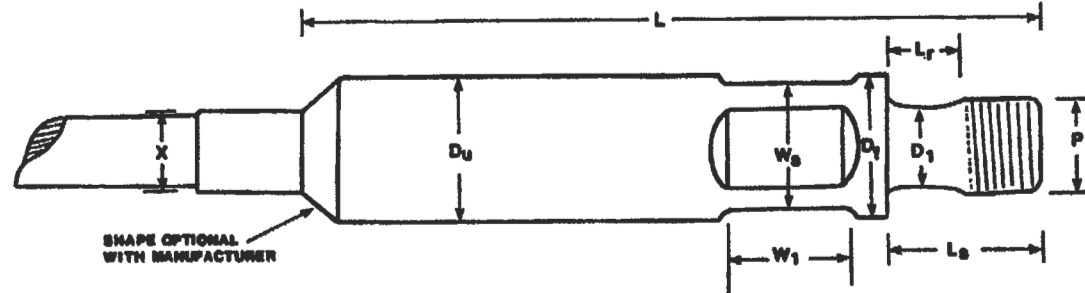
General dimensions and tolerances for reinforced plastic sucker rods and pony rods [64].
